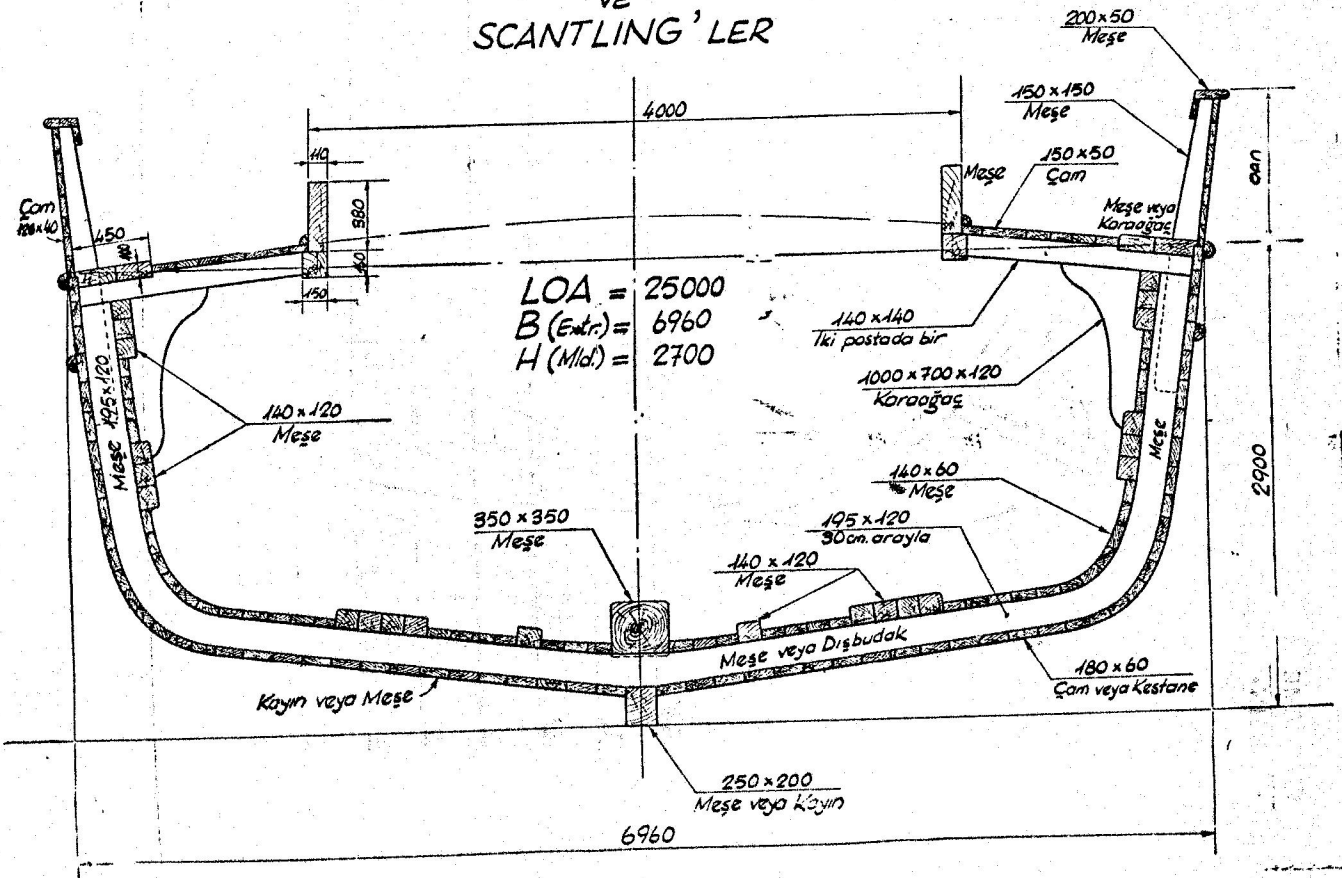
The construction detail and Scantlings of Çektirme «Bartın».
